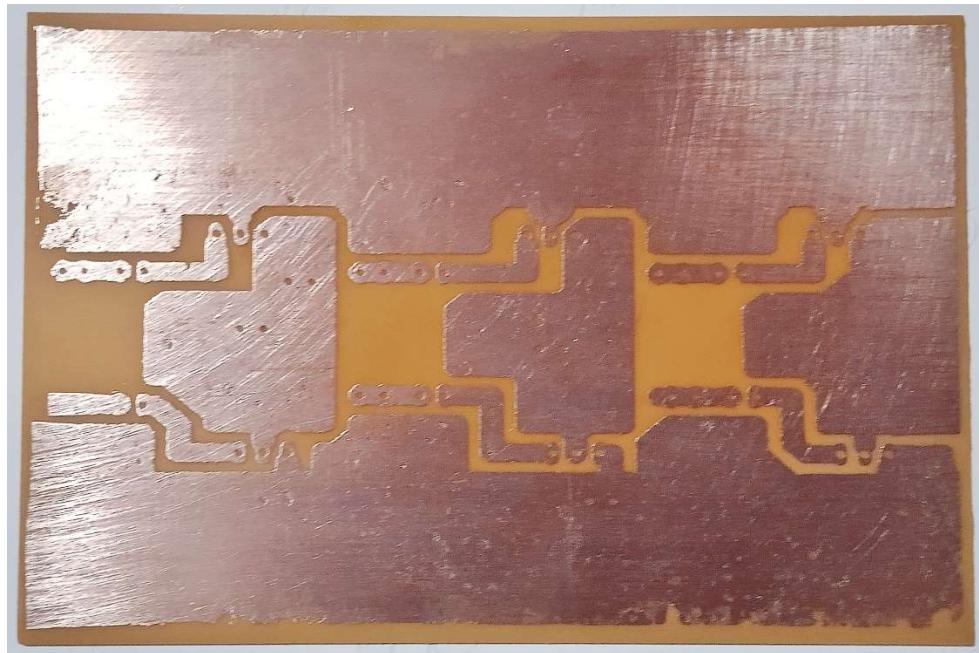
18: PCB layout (Copper, solder-mask, silkscreen) layers (2)
